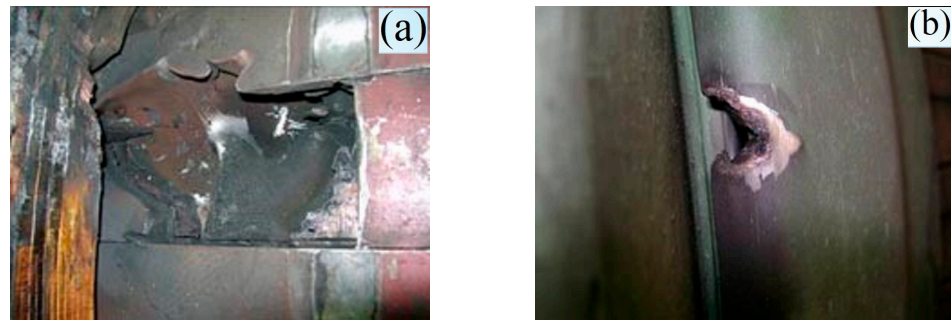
Damaged TGV-1000 shaft (after winding short circuit) in the hydrogen sealing zone. (a)—rotor body, (b)—retaining ring.
